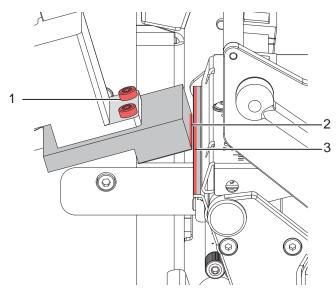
Adjusting the Parallelism between Pad and Dispense Edge
